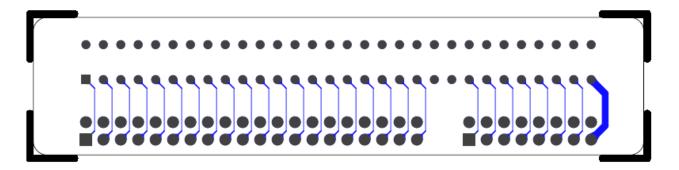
CPU-Electrode relay board: Component Side Pattern
